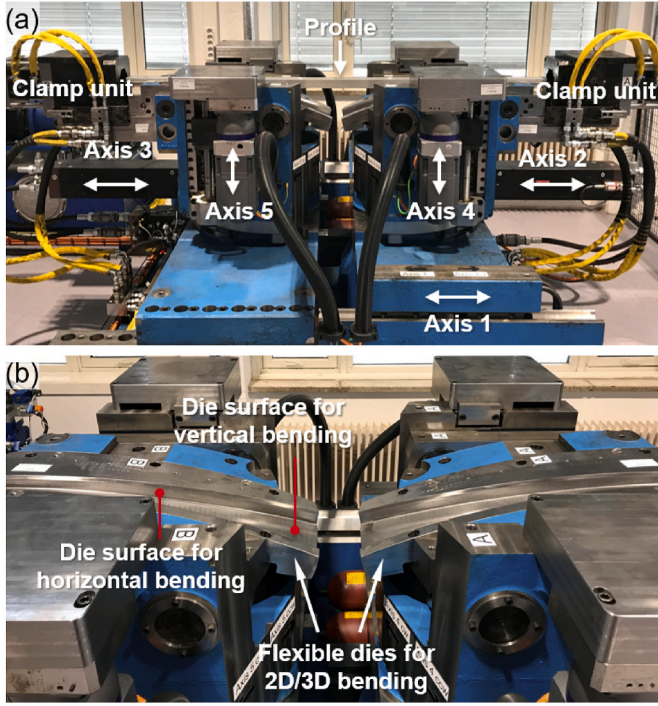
Full scale, laboratory-based flexible stretch bending machine system: (a) overview of the machine; (b) flexible dies for 2D/3D bending.
